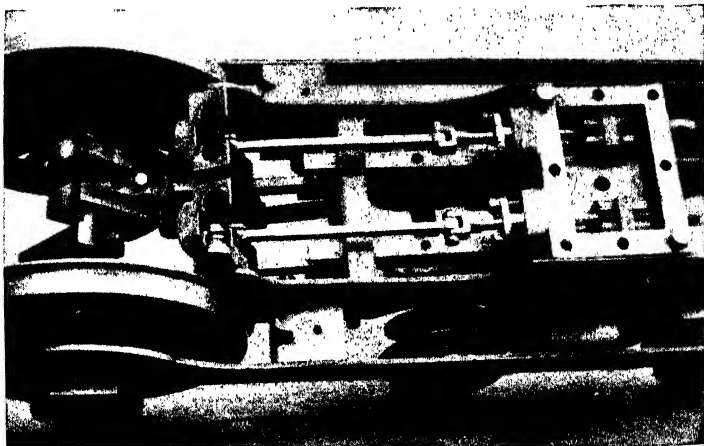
A.—Model 2½-in. Gauge Engine Fitted with Greenly's Corrected Valve Gear.
